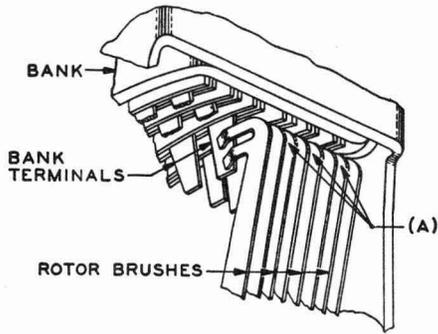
Heel Spacing Between Brush Members of Adjacent Pairs
